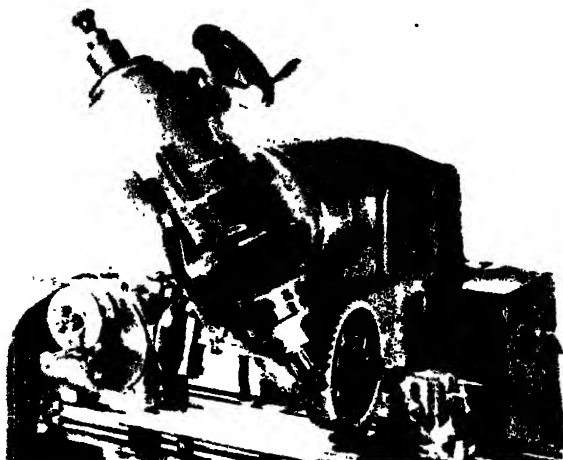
Cutting a spiral gear. (*The Brown & Sharpe Manufacturing Company*)
